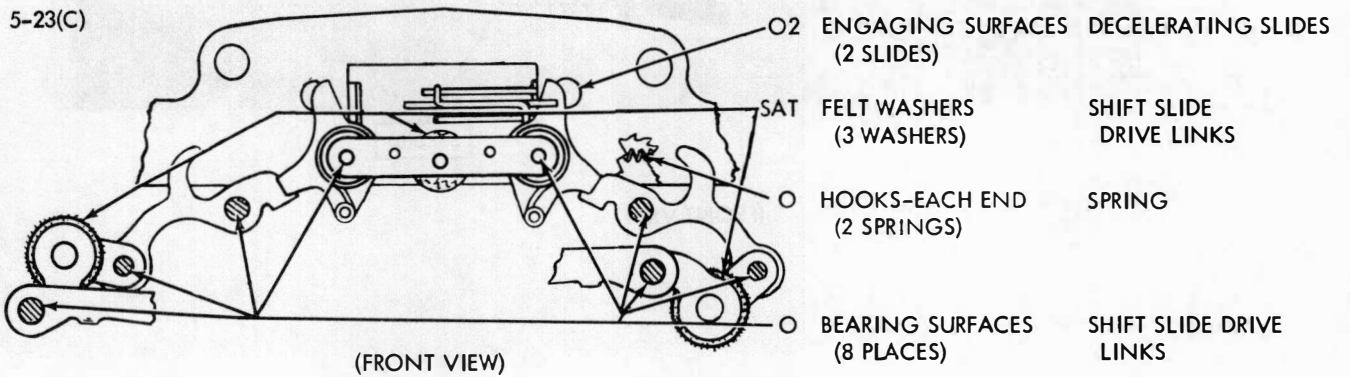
Automatic Typewriter Lubrication — Horizontal Positioning Mechanism, Front View
